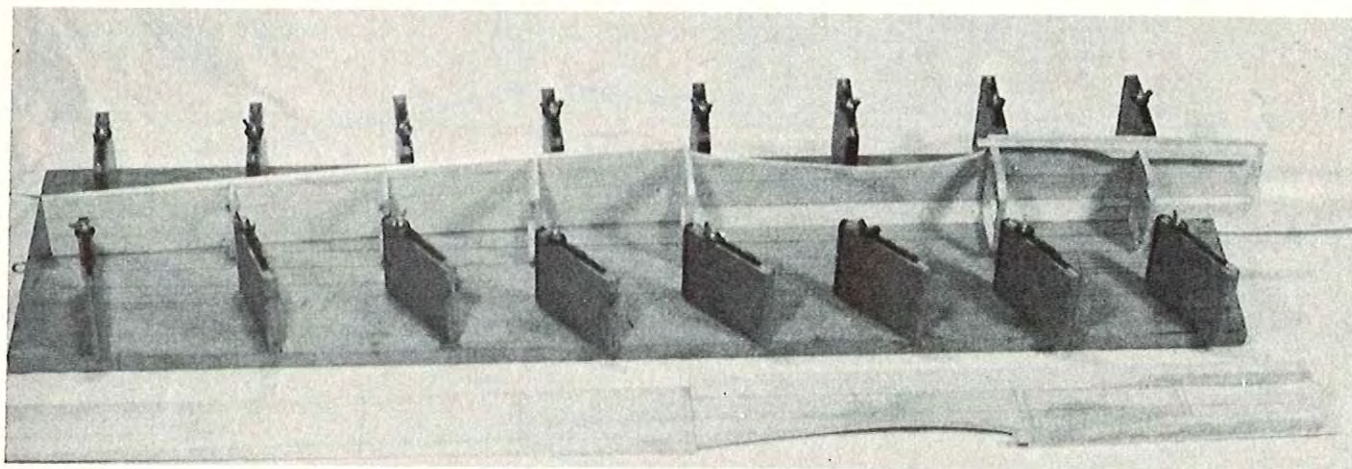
Jig blocks loosened on one side so that formers may be removed.
